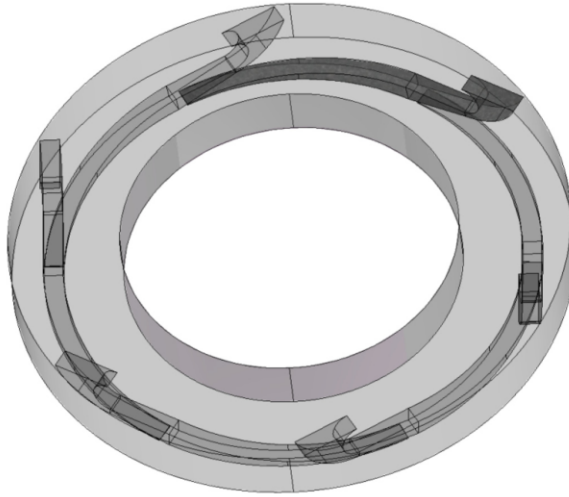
Three dimensional geometry of the nozzle vanes with rectangular section [4].
